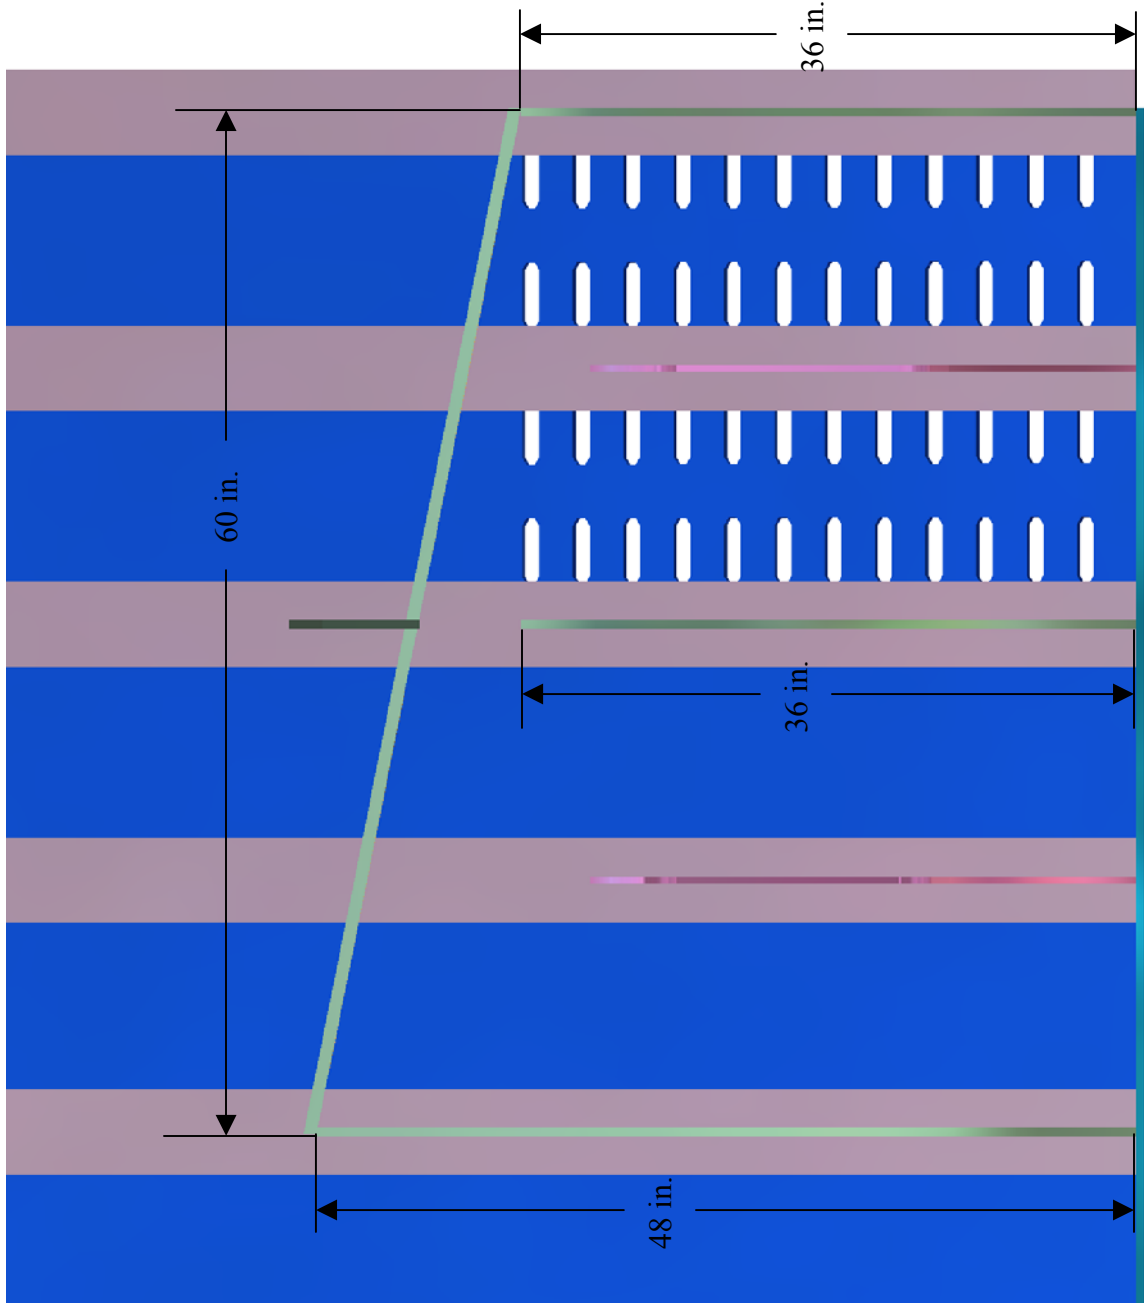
Seachest Looking Outboard with Inboard Plate Removed
